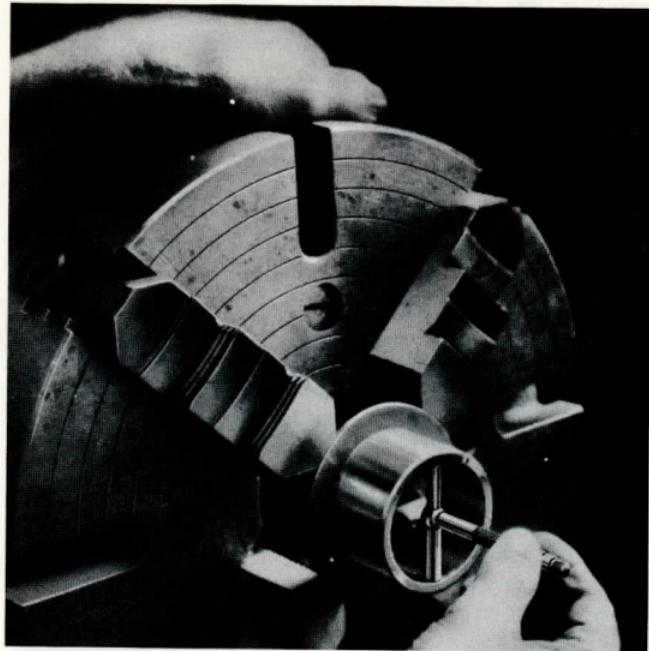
By setting a telescoping Gage to a caliper or micrometer, holes can be made and measured for shrink, close or loose fits.
